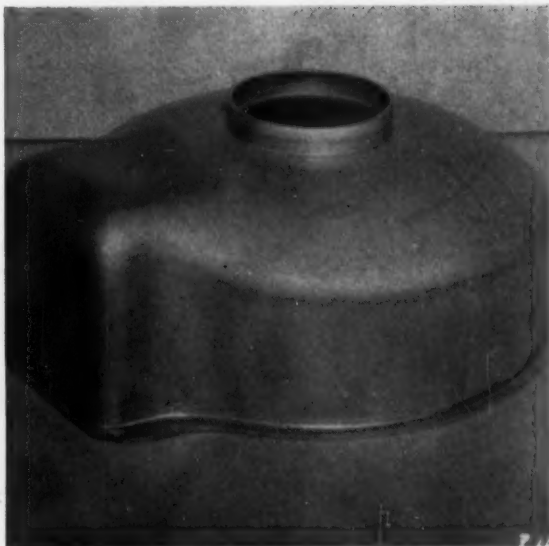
The two halves just before welding. Dome has been punched and drawn for welding to neck tube;
